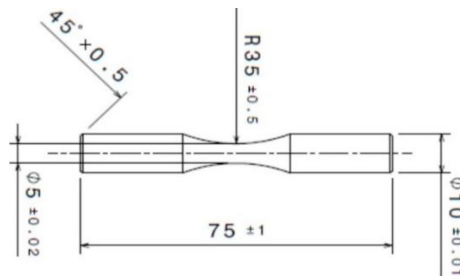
The rotating bending fatigue sample geometry and dimensions (in mm).
